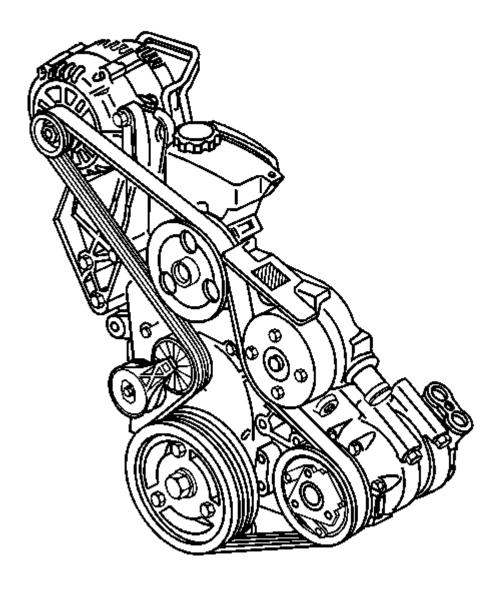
Properly Routed Drive Belt Courtesy of GENERAL MOTORS CORP.
